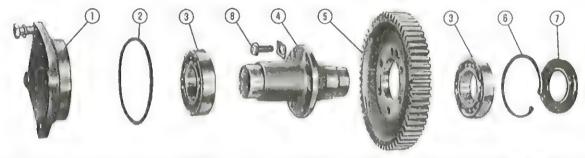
Exploded view of P.T.-O. front driving gear assembly (located in the lower compartment of the clutch housing).
